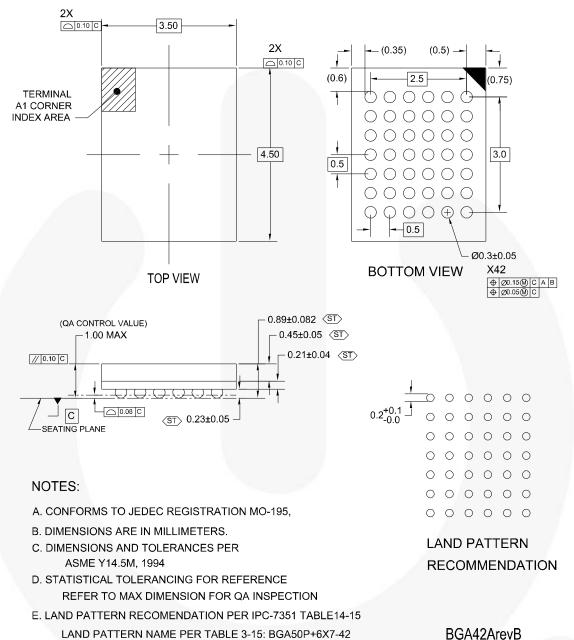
42-Ball, Ball Grid Array (BGA) Package
